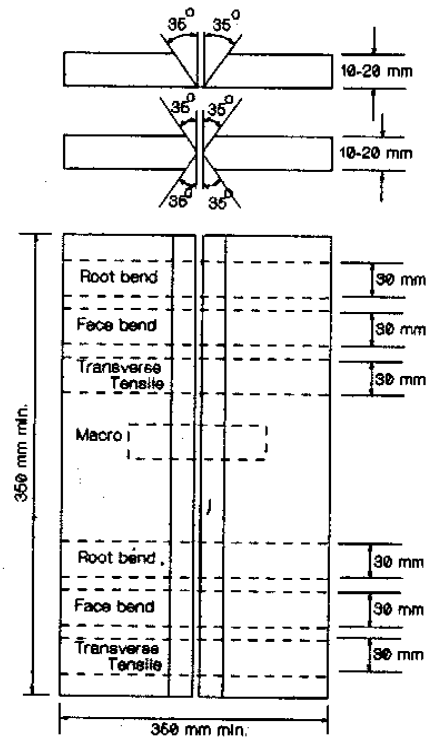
Butt weld test assembly (positional welding)
